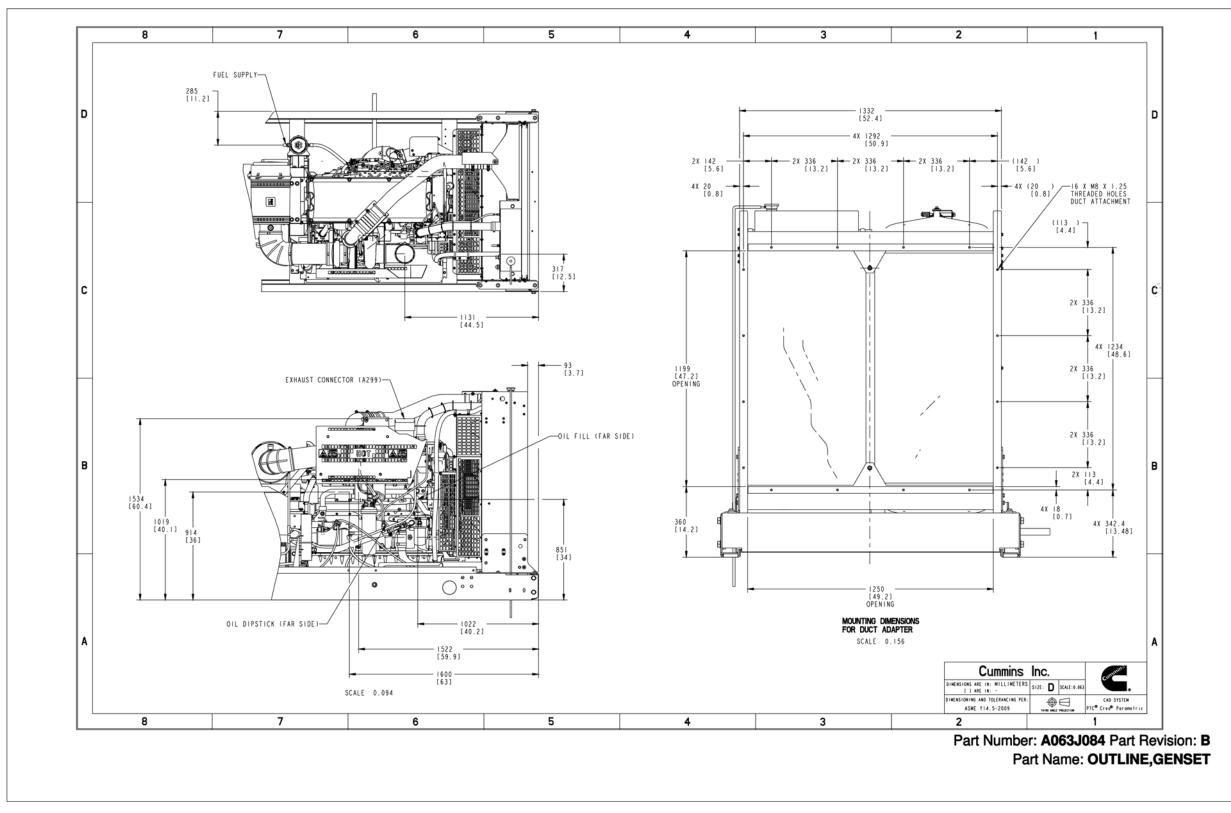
GENERATOR SET OUTLINE DRAWING (SHEET 2 OF 4)
